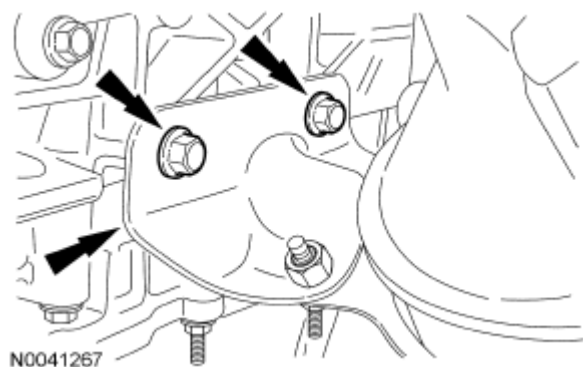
Locating Catalytic Converter Bracket And Bolts
